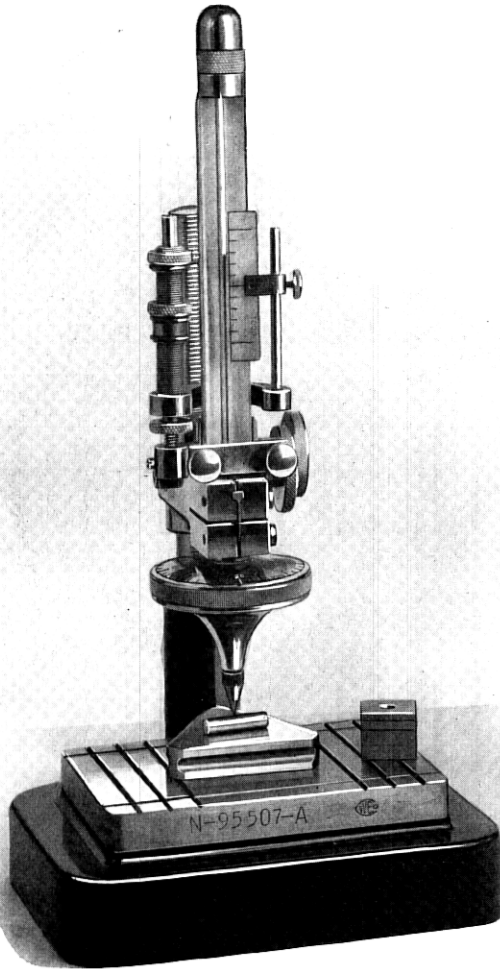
Fluid gage or “prestometer” showing tool part in position for measuring
